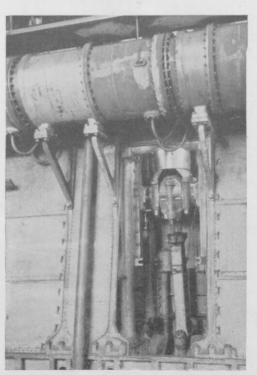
Fig. I. Removing piston, first operation. Cylinder heads and valve gear are not disturbed
